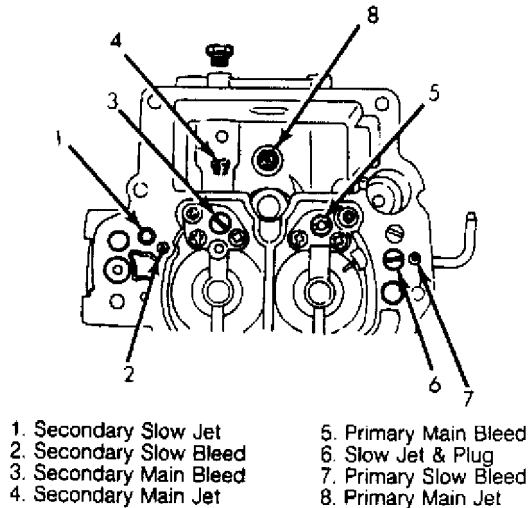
Locating Air Bleeds & Jets (Main Body)
